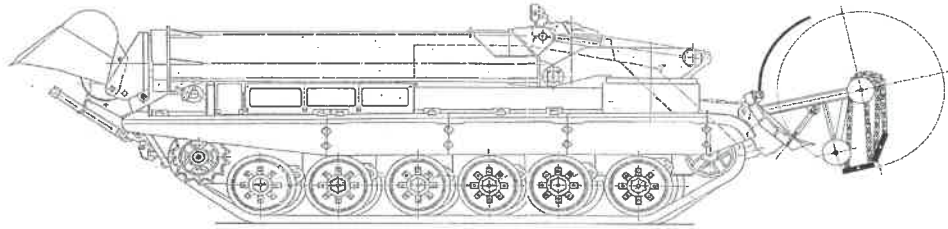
General view of Engineering and Road Machine with mounted flail [5]
